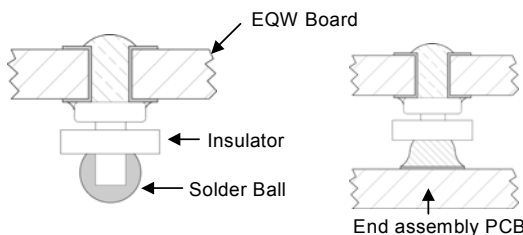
Column Pin Connector Before and After Reflow Soldering.
